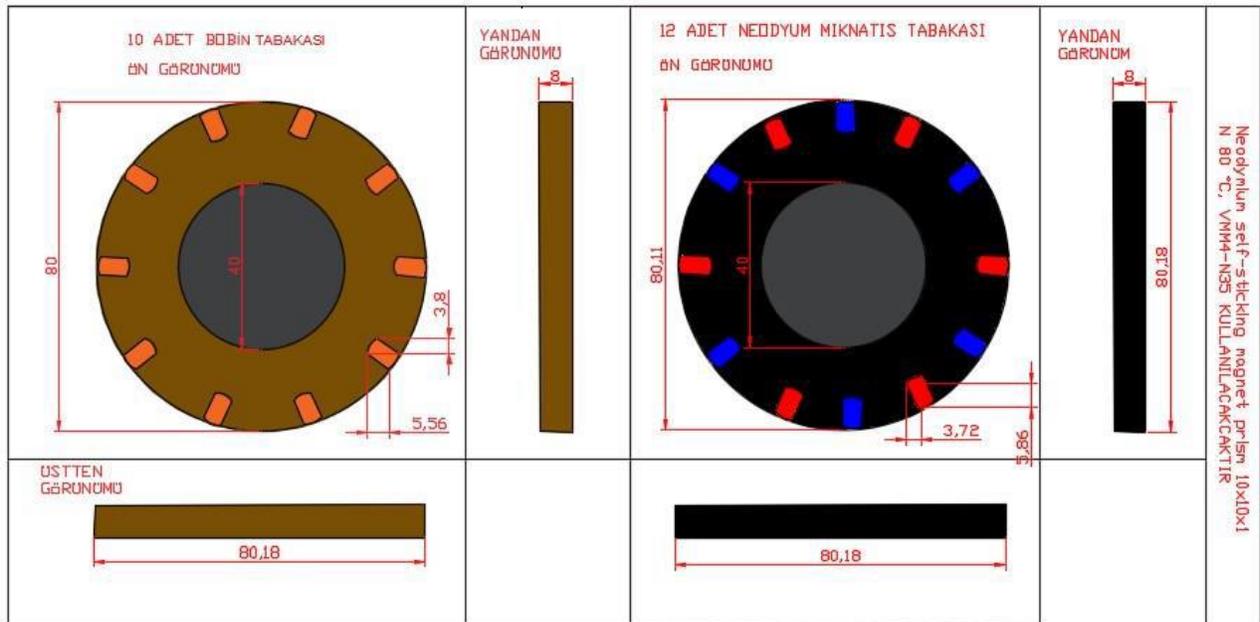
The winding diagram and the position of the magnets on the rotor disk.
